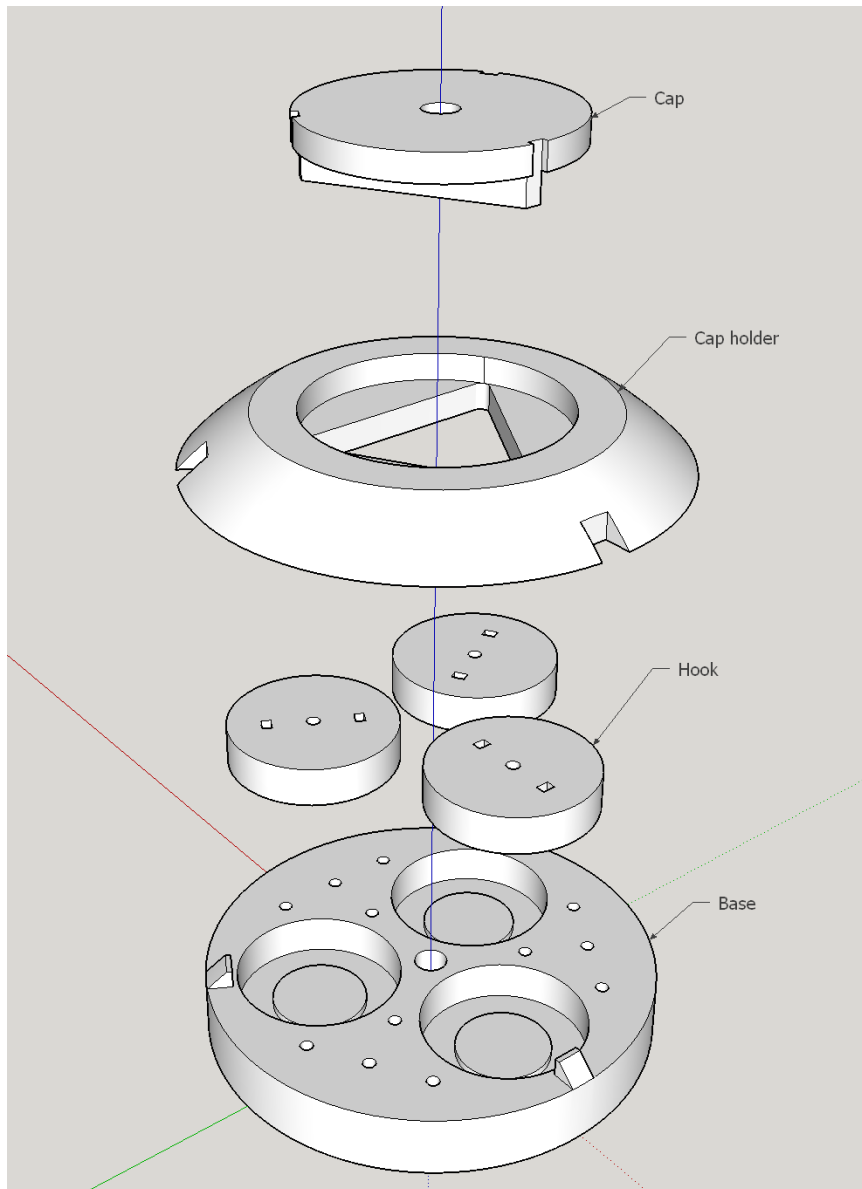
EXPLODED VIEW OF THE PLATFORM ELEMENTS
